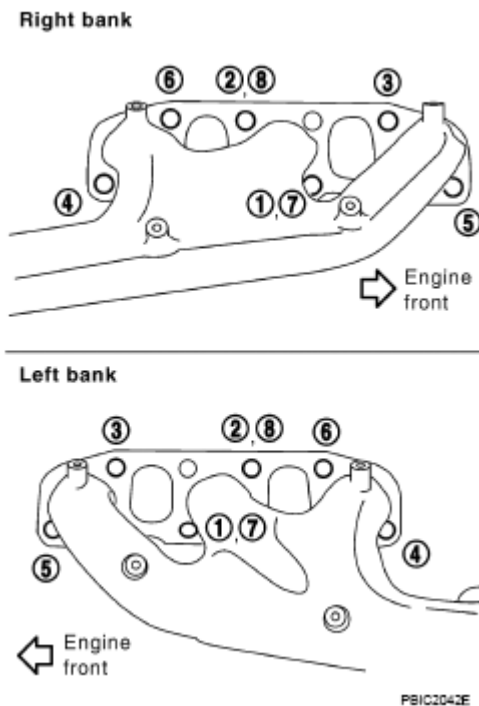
Identifying Exhaust Manifold Nuts Loosening Sequence
